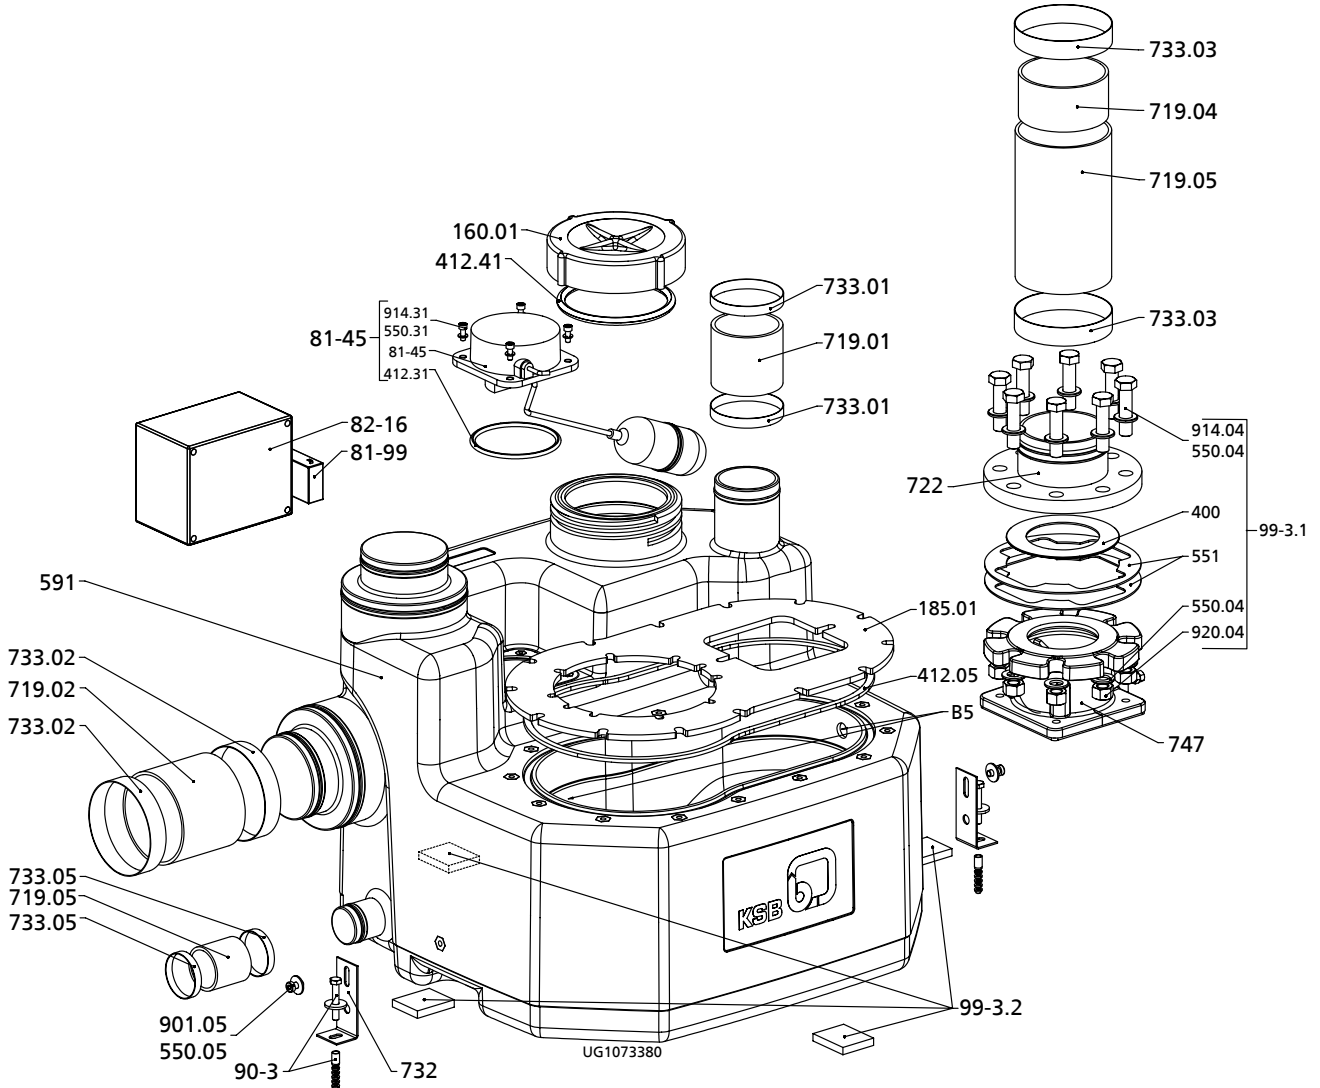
Exploded view of Compacta U100 - Collecting tank
